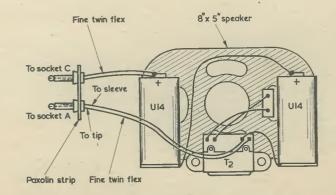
The add-on loudspeaker unit. A suitable baseboard may be used for mounting the components
